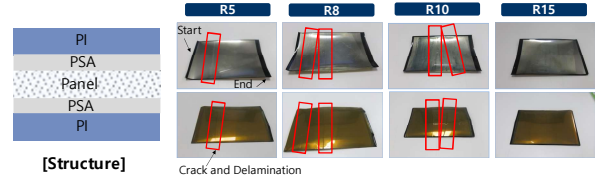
Position of crack or delamination during rolling process with different rolling radius.
